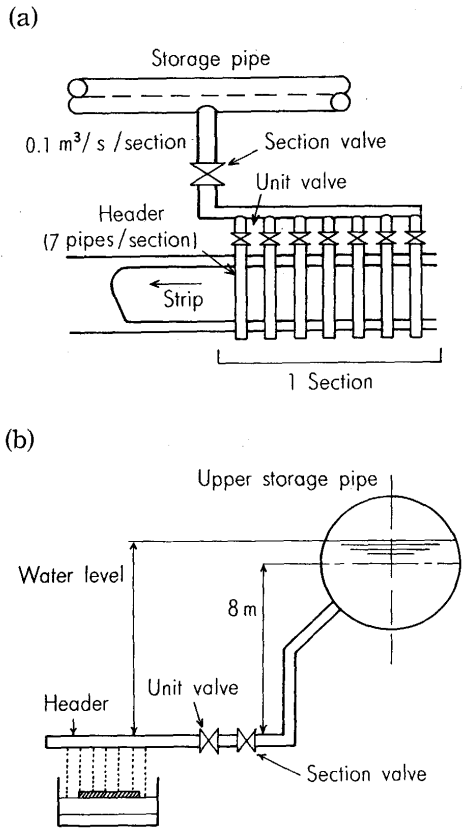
Detail of cooling equipment. (a) Cooling header layout. (b) Overhead main storage pipe.
